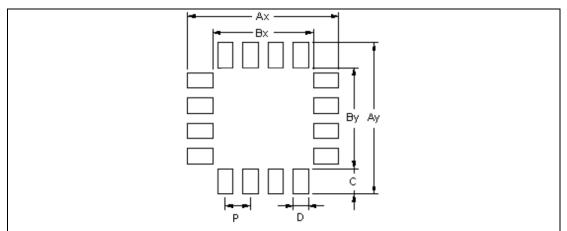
QFN16 footprint: Please refer to the Table 12 for the dimensions. For best temperature accuracy it is not recommended to solder the thermal pad of the QFN package to the printed circuit board
